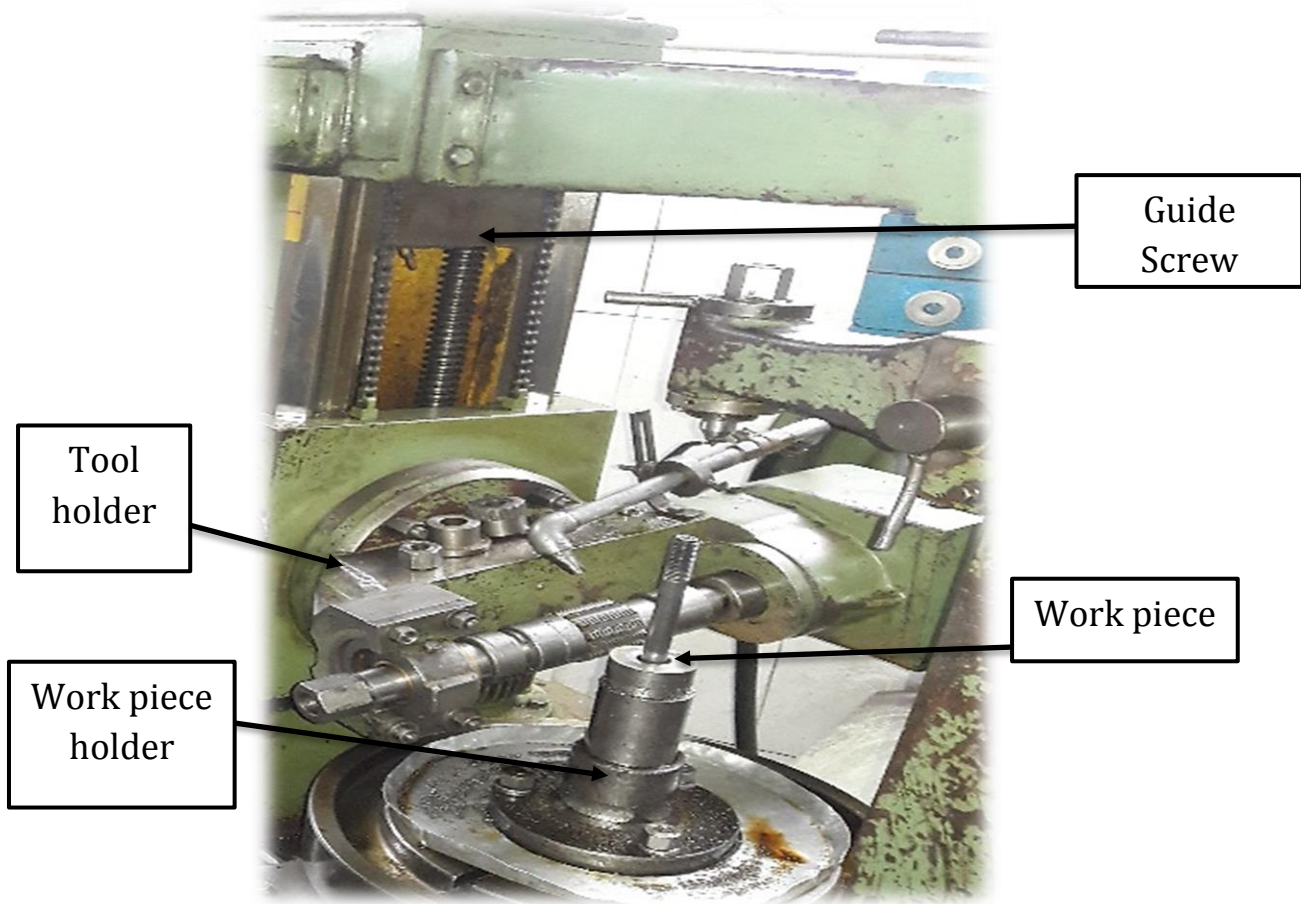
Hobbing Machine (Courtesy to Subham Gears – Rajkot) ⁽³⁾
